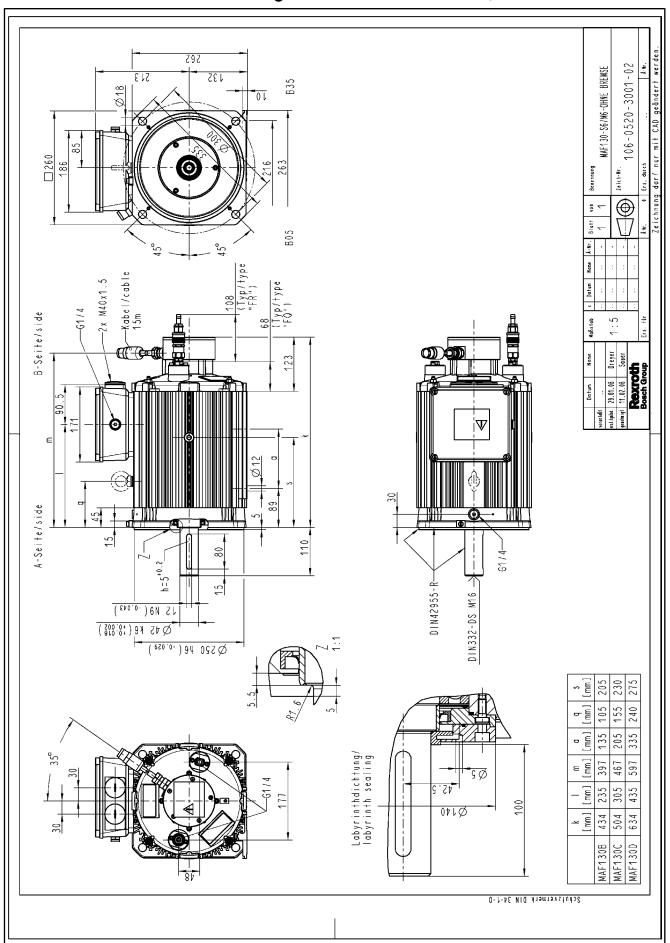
Dimension sheet MAF130 with brake 1 or 5
